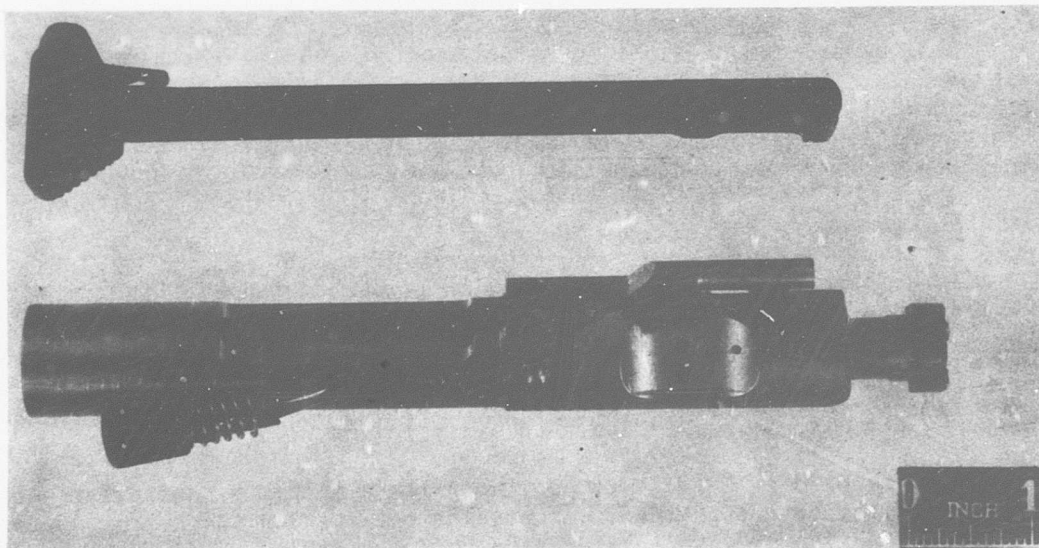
Standard AR15 Rifle Charging Handle and Serrated Bolt and Bolt Closing Plunger Group Removed from Receiver Housing.
